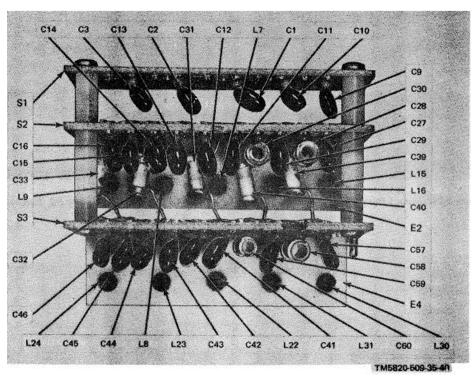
Signal Data Translator CV-1377A/PRC-47 (A8A4), Switch Assemblies S1, S2, and S3, Bottom View, Card Assemblies E2 and E4.
